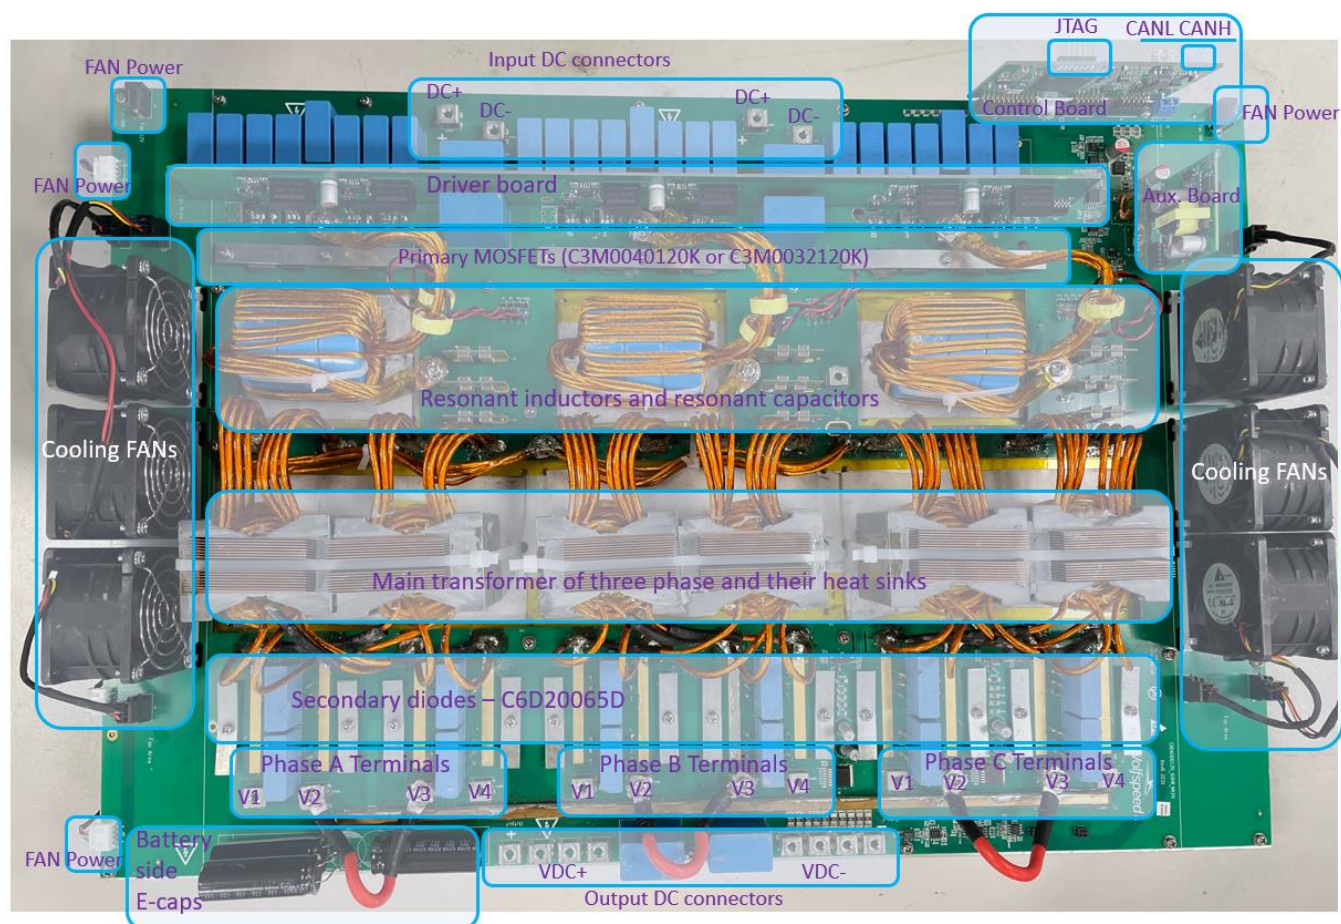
Top View of PCBA (490mm*390mm*65mm)
